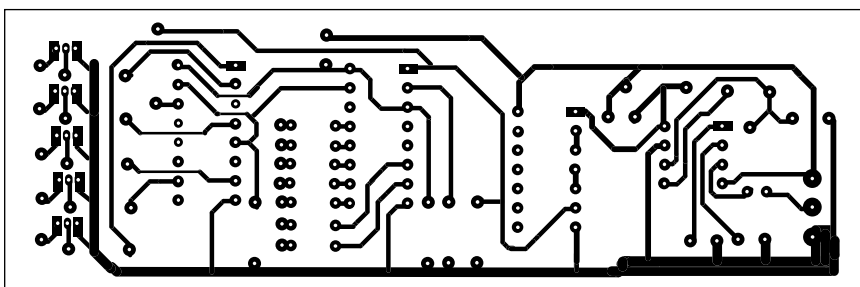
Actual size PCB layout for fan switching and speed control circuit of Fig. 6
